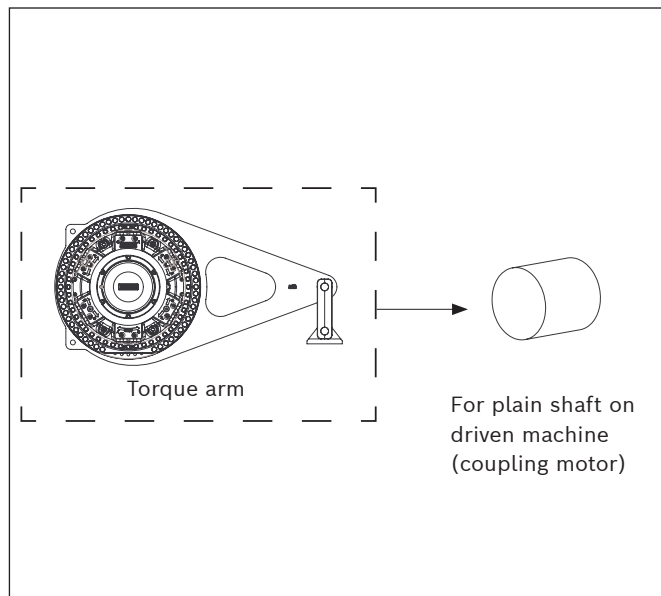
Single ended torque arm mounting for plain shaft (Only for CBm 2000 and CBm 3000 coupling version)
